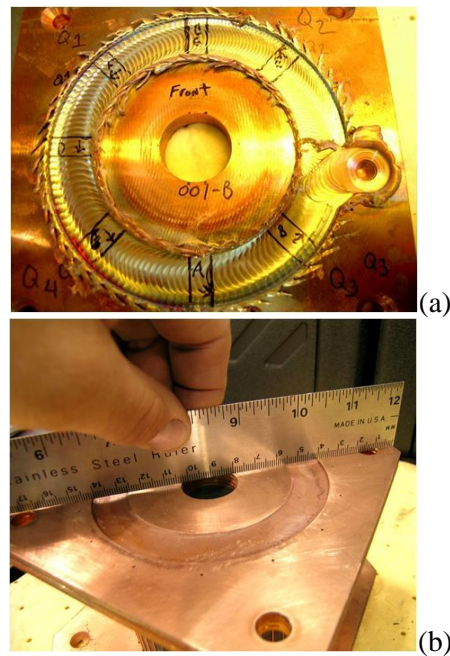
Circular weld run too hot showing (a) excessive flash and loss of material and (b) excessive distortion.
